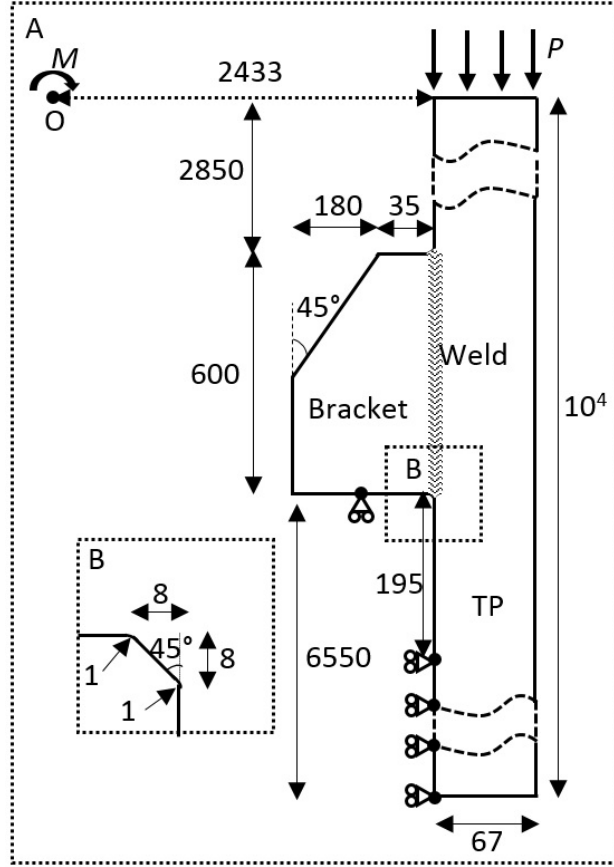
Geometry, constraints and load set-up of the offshore welded component with dimensions in mm.
